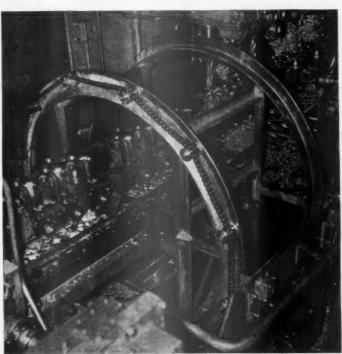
Washing and tipping station included on Renault transfer machine. Guards removed.
